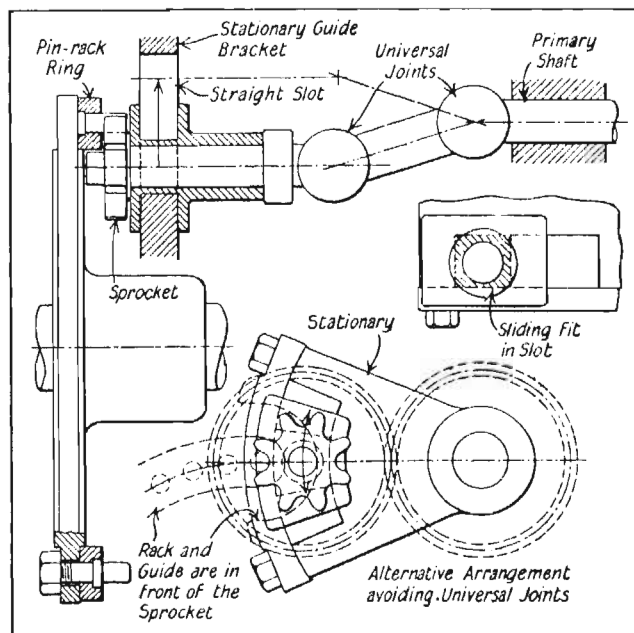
Types of Drives Arranged to Permit Oscillation of Driving Shafts such as the One Shown at b, Fig. 4
